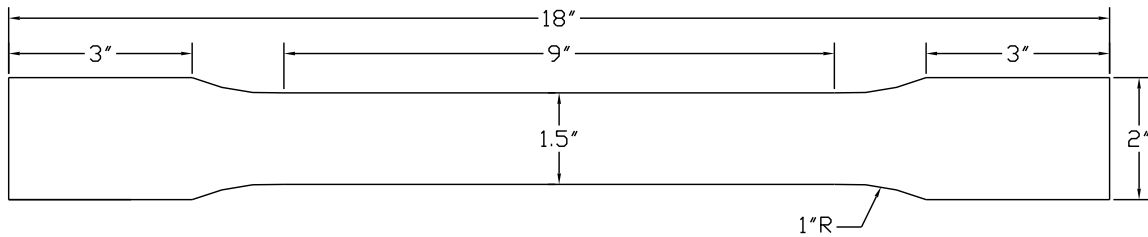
Dimensions of test coupon chosen for the uniaxial tensile tests
